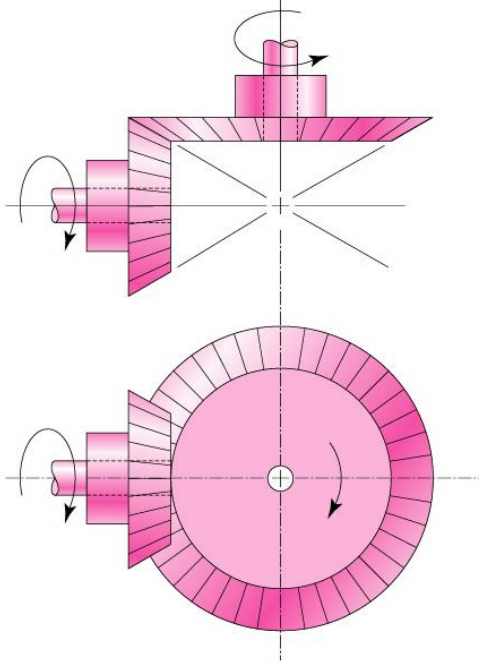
Bevel gears have teeth formed on conical surfaces and are used mostly for transmitting motion between intersecting shafts.
